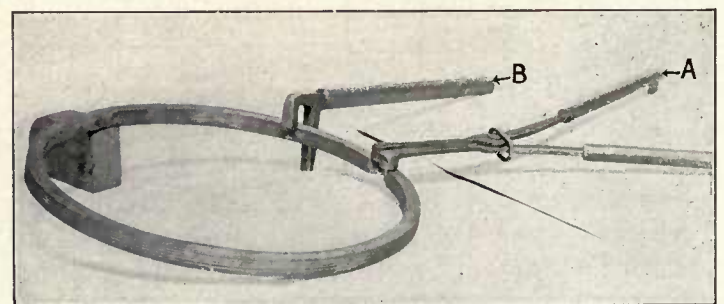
Tools for Applying Snap Rings to Piston Head.
